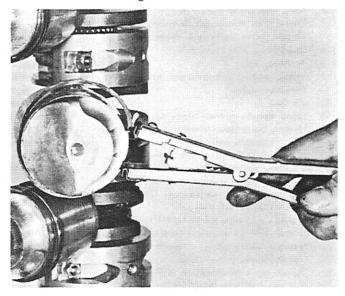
Remove and Install Piston Rings Revised Jan. 1960 Page 49
